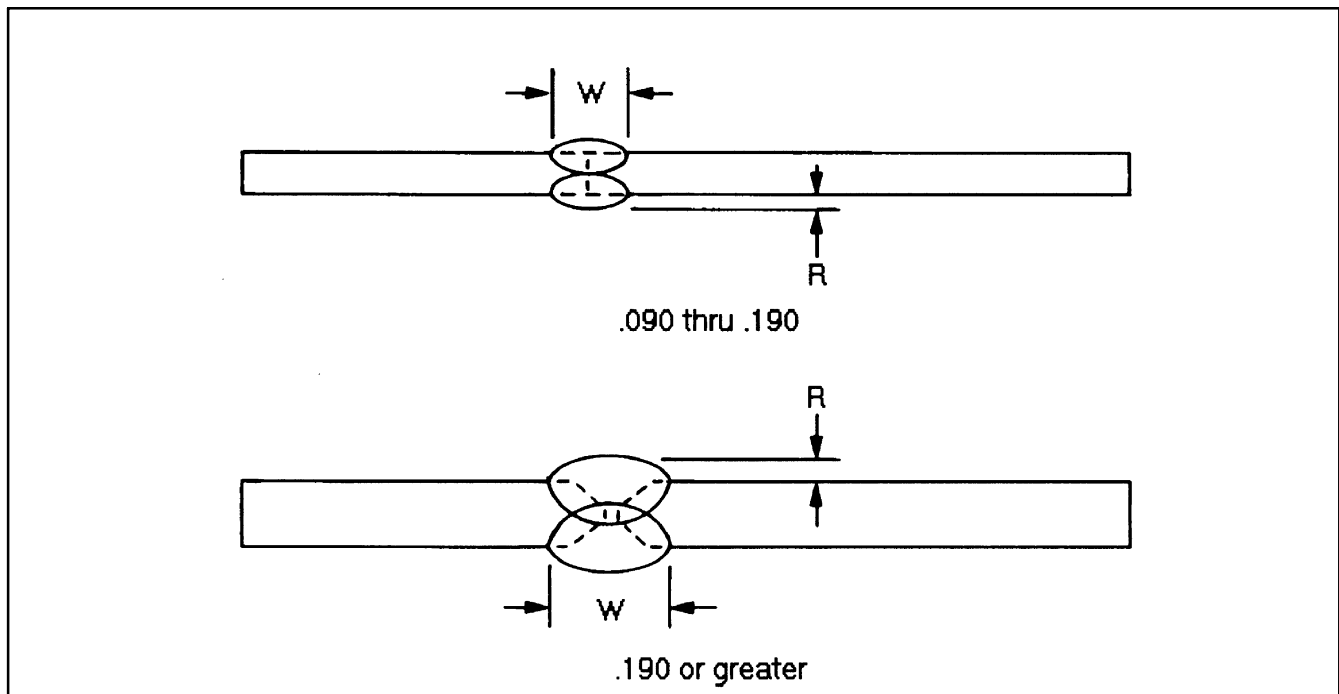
Butt Weld Bead Size, Welded From Both Sides
